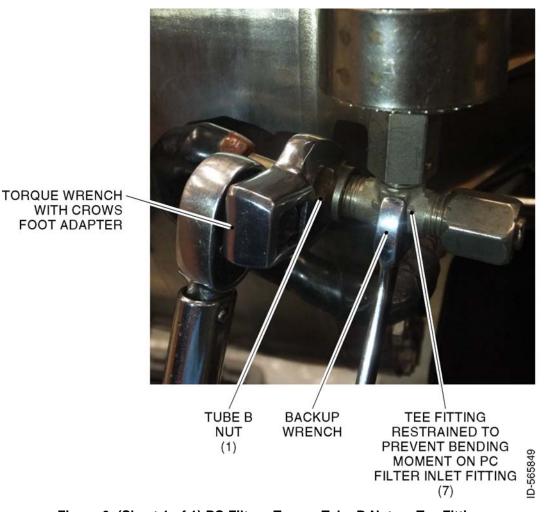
(Sheet 1 of 1) PC Filter - Torque Tube B Nut on Tee Fitting
